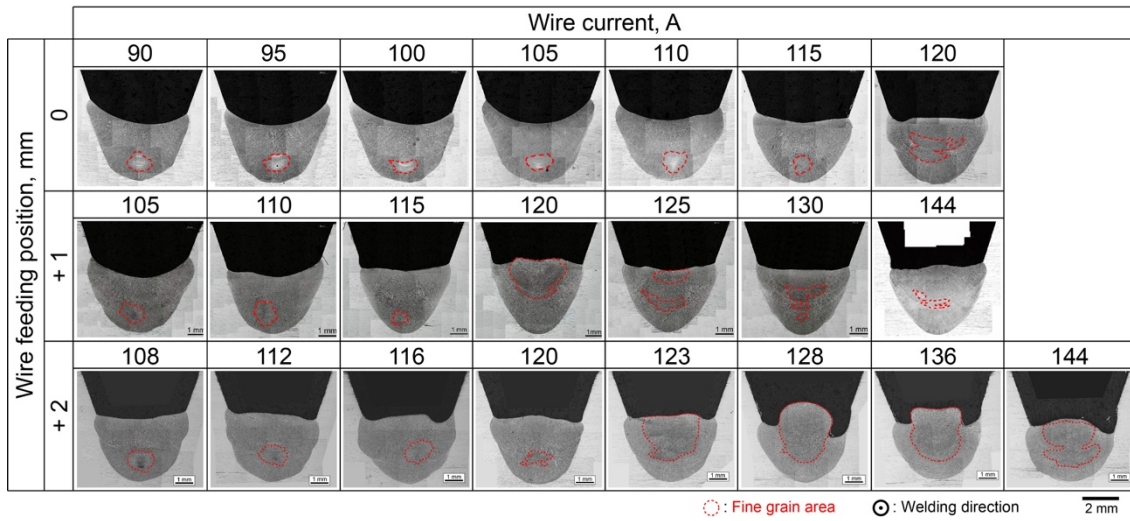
Cross-section of weld bead at each wire feeding position.
